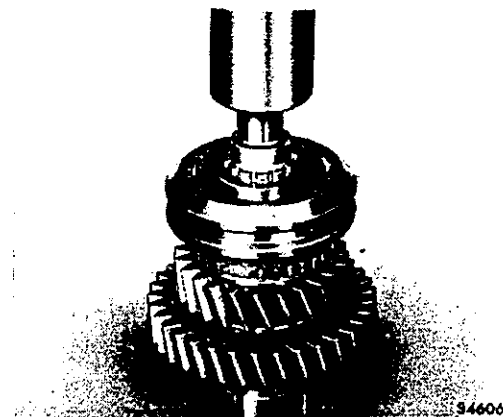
Pressing clutch hub and third speed gear sleeve off mainshaft.
